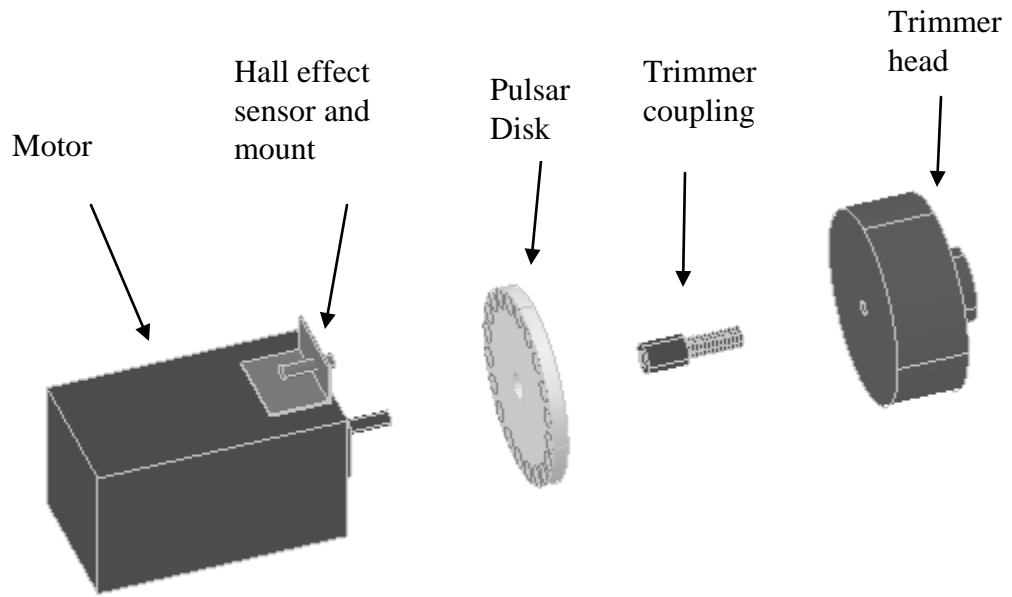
Drawing of electric motor with sensor and pulsar disk and trimmer head
